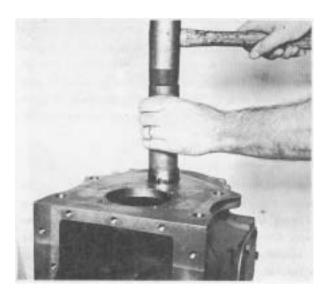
If countershaft front bearing is to be replaced, remove clutch housing and drive front bearing from transmission case. Apply a light coat of permatex No. 2 on the outher diameter of the new bearing. Install in transmission case as shown with end of bearing .001 to .007 below the face of case. Install main drive gear andearing assembly in transmission case. Install main drive gear bearing cap on drive gear.
